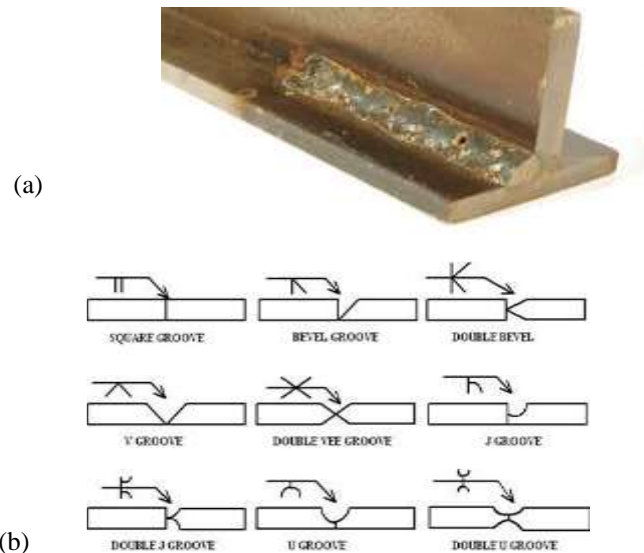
(a, b) - Weld defects & Weld grooves
